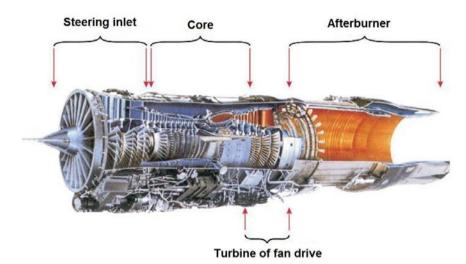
Cross section of the engine Pratt & Whitney F100-PW-229 [1].
